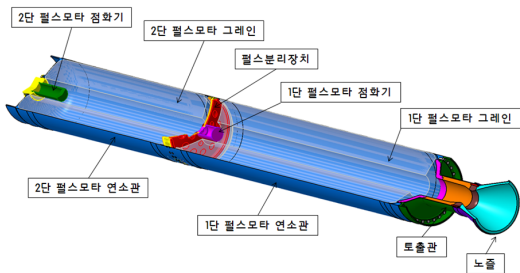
Schematic Drawing of Dual Pulse Rocket Motor
